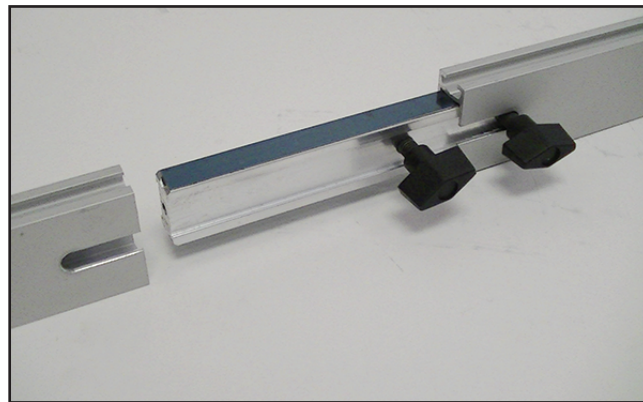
Detail A: Most horizontal extrusion connections have a patented expandable lock. This lock inserts into the groove of an opposing extrusion. Tightening the lock with the hex key tool expands the lock and creates a strong connection.
